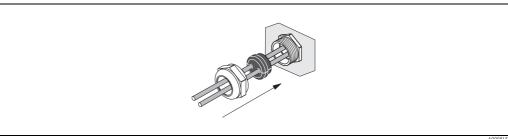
Cable gland for two connecting cables (2  $\times$  Ø 4 mm / 0.16 in) per cable entry
